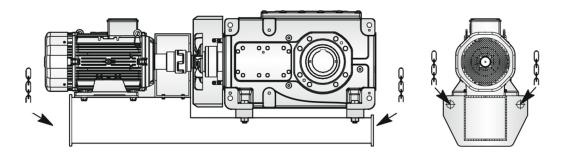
d: Position of additional lifting points for reducers with torque arm, type HB
